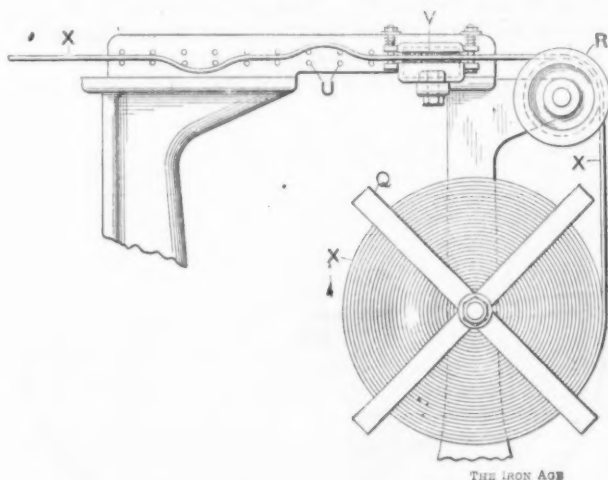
Elevation of Safety Tension Mechanism through Which the Strip is Drawn.
